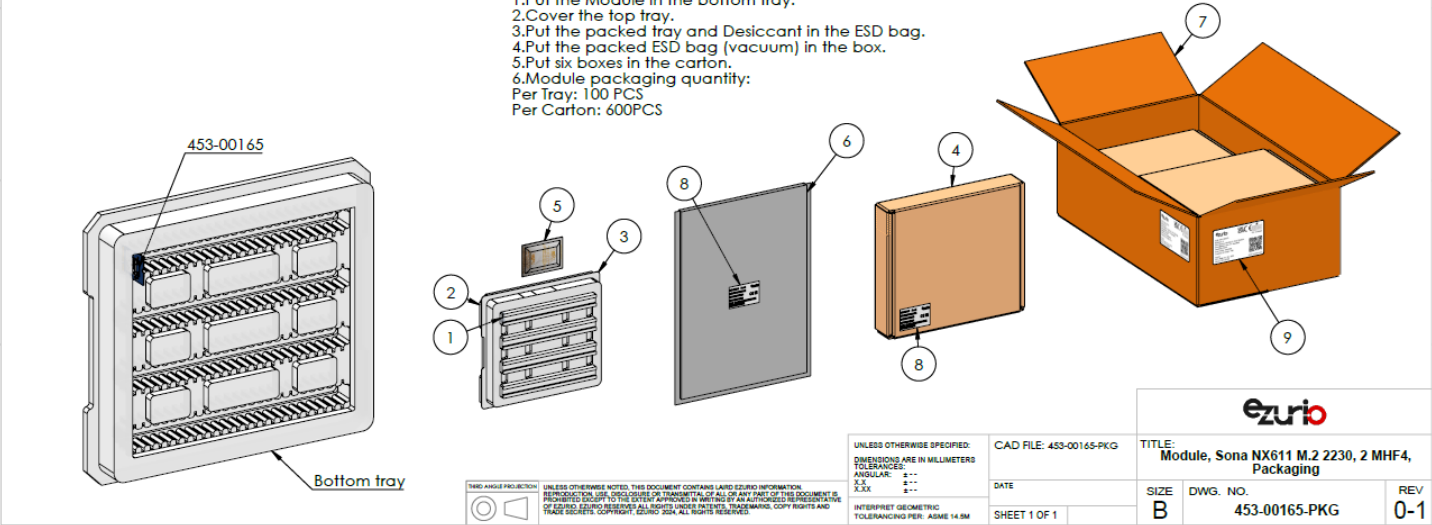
SONA™NX611X M.2 2230 module packaging process, 453-00165
